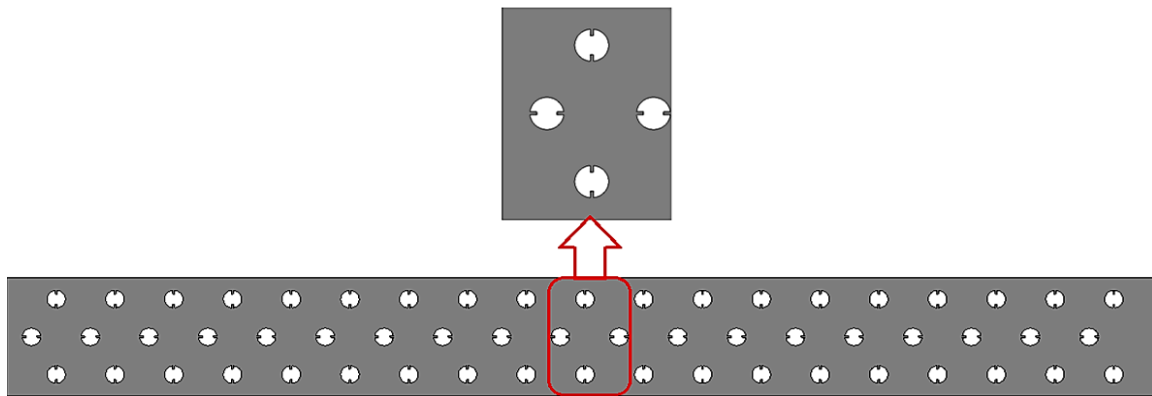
CAD model of the Design-3 CO₂ (carbon dioxide) finned tube gas cooler.
